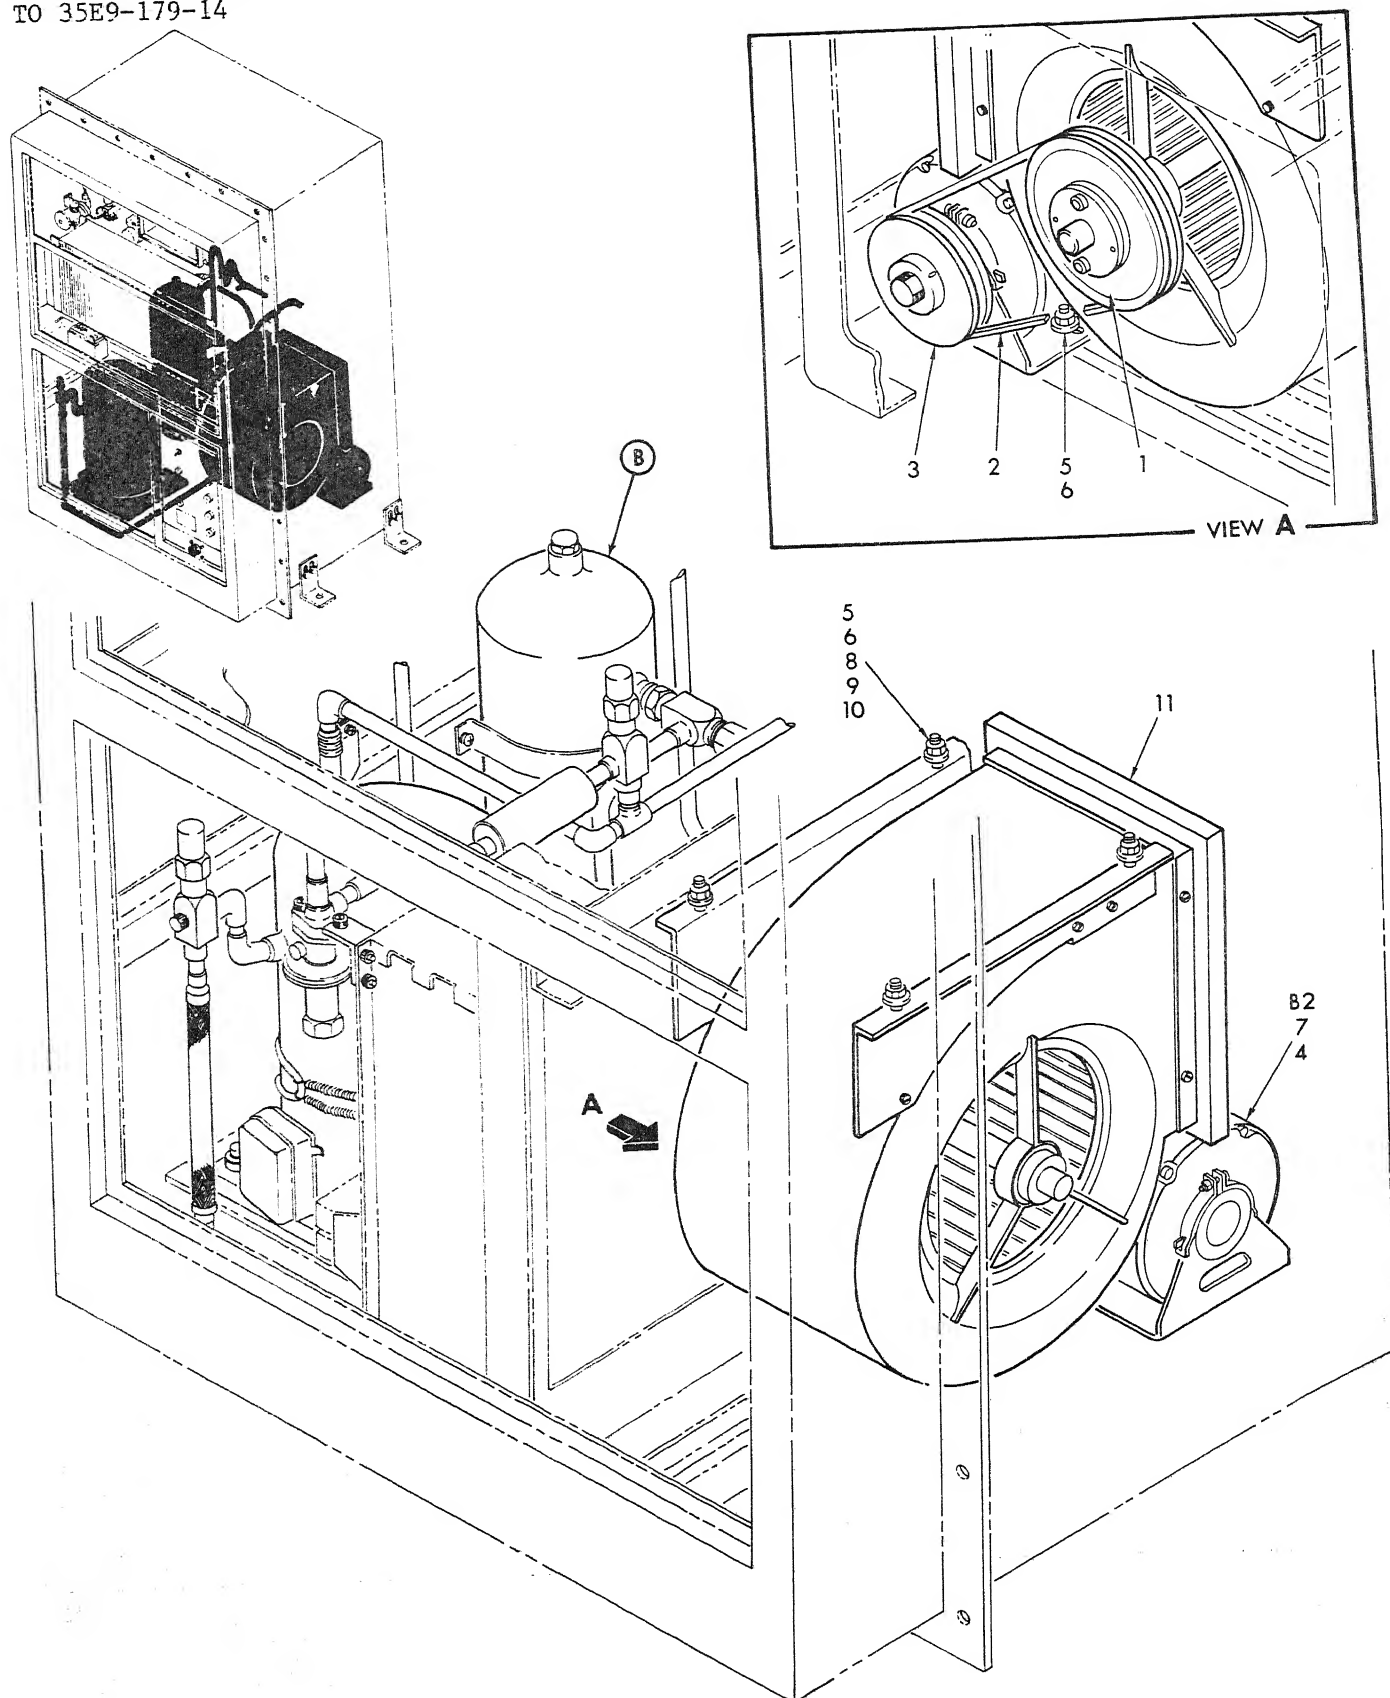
CONDENSER FAN AND MOTOR SECTION (SHEET 1 OF 2)
